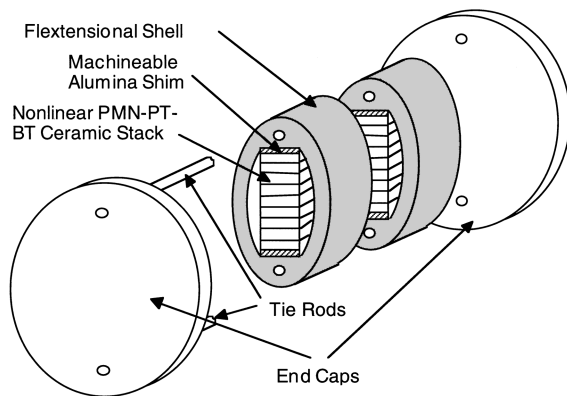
Exploded view of a class-IV flextensional transducer with a nonlinear electrostrictive driver.
